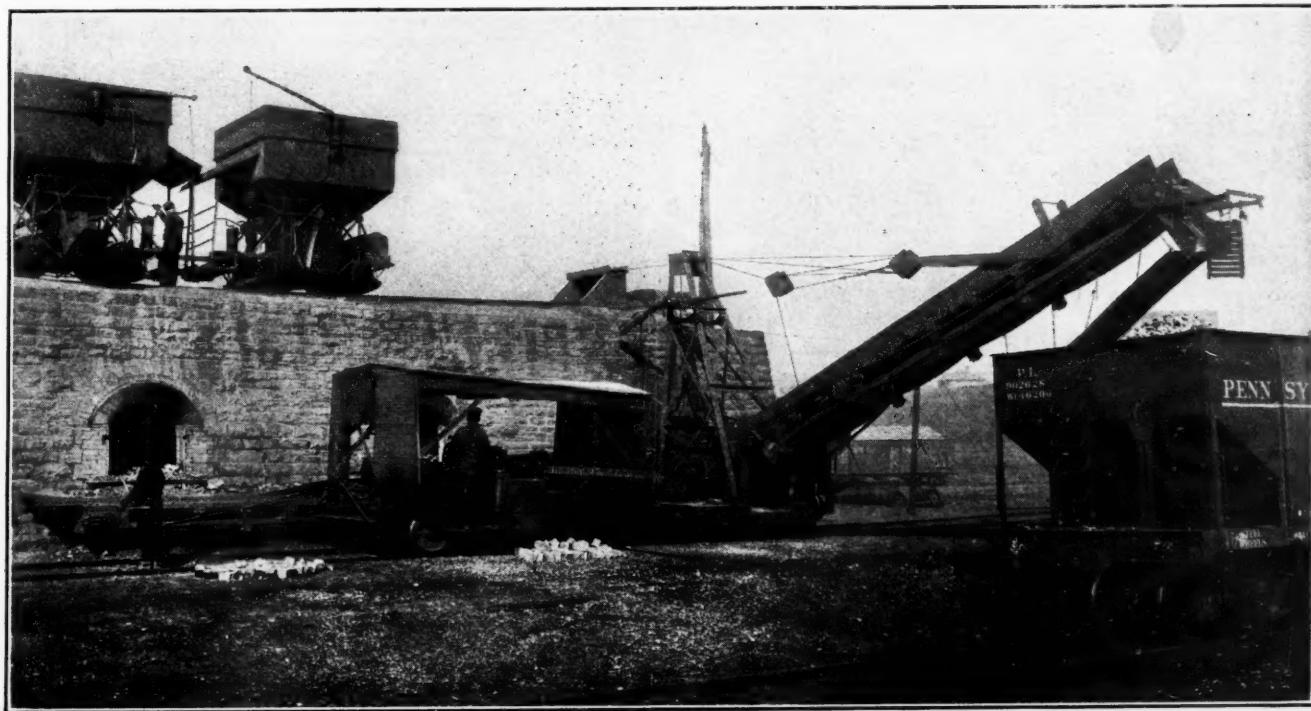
COVINGTON COKE-DRAWING AND LOADING MACHINE OPERATING AT A PLANT OF THE FRICK COKE CO. IN WESTERN PENNSYLVANIA
